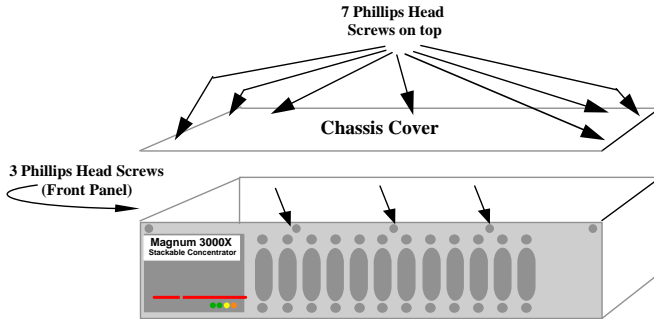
Removing Magnum 3000X Chassis Cover
